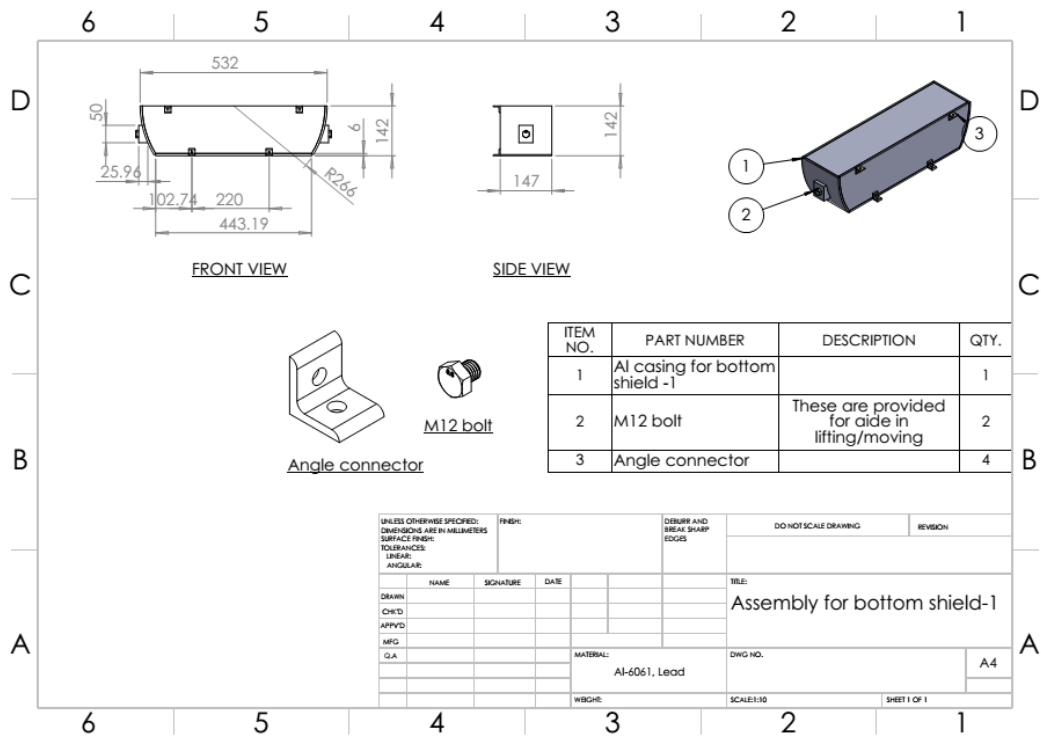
Design of Bottom Aluminum casing- 1. The casing is made of Al-6061 alloy and the inside will be filled with lead.
